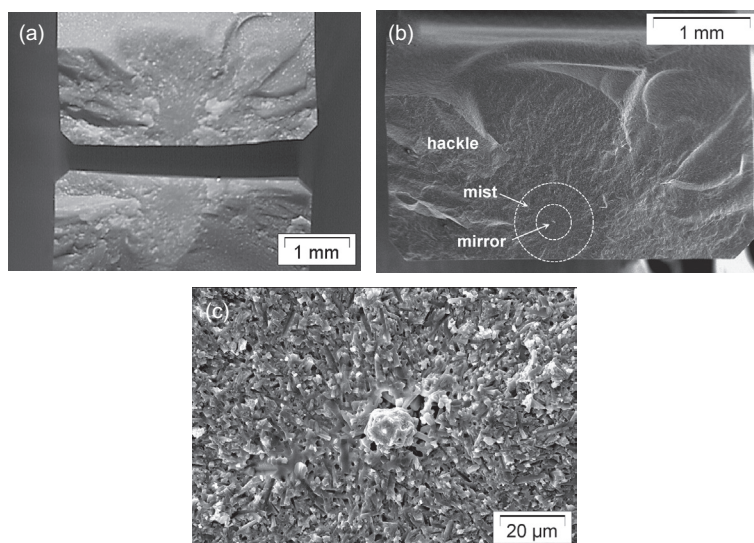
Fracture surface of a silicon nitride bending bar. (a) Macroscopic view of two mating fracture surfaces. The tensile stress was acting on the edges in the middle of the picture. The crack path is perpendicular to the loading direction. (b) Fracture surface of the upper piece from (a). Fracture mirror, mist, and hackle can be recognized on the fracture surface. (c) The fracture origin (agglomerate of sintering aids and inclusion) can be found in the center of the mirror. In the picture it spreads from the lower left-hand corner to the upper right-hand corner.
